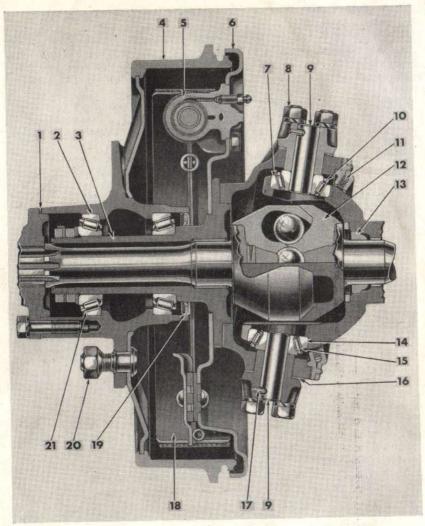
FRONT STEERING KNUCKLE-Model 4WD
